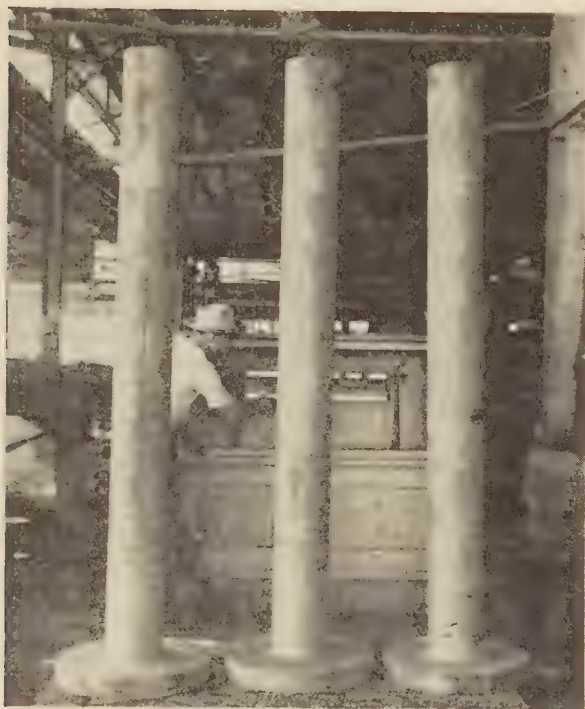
RUDDER STOCK, FABRICATED FROM CENTRIFUGALLY CAST TUBING, WELDED TO STATICALLY CAST FLANGE SECTION
